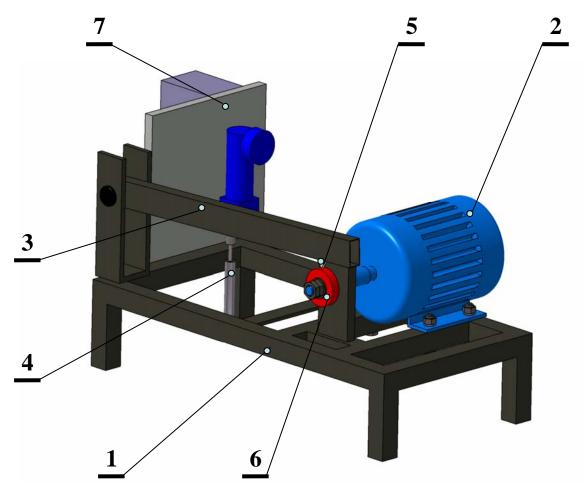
Design of cutting and chipping tester 1 – frame, 2 –electric motor, 3 – beam, 4 – pneumatic cylinder, 5 – ceramic tool, 6 –rotating sample, 7 – control panel
